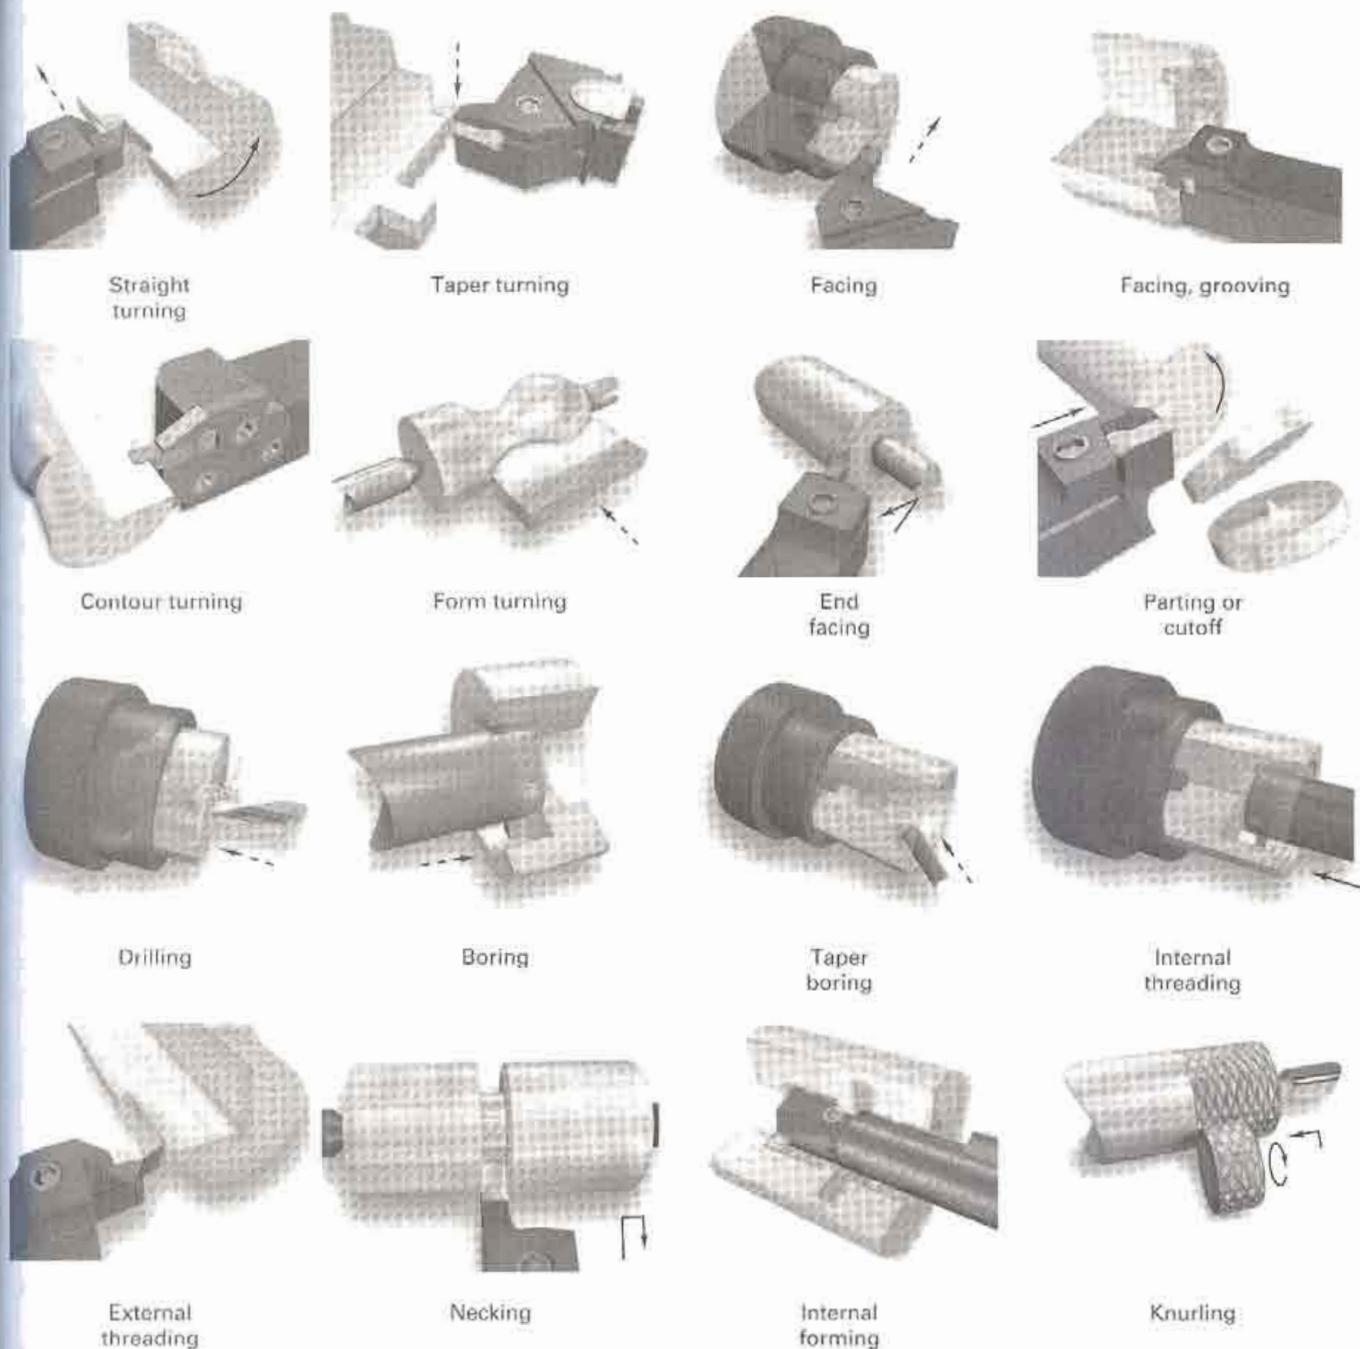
Basic turning machines can rotate the work and feed the tool longitudinally for turning and can perform other operations by feeding transversely. Depending on what direction the tool is fed and on what portion of the rotating workpiece is being machined, the operations have different names. The dashed arrows indicate the tool feed motion relative to the workpiece.
